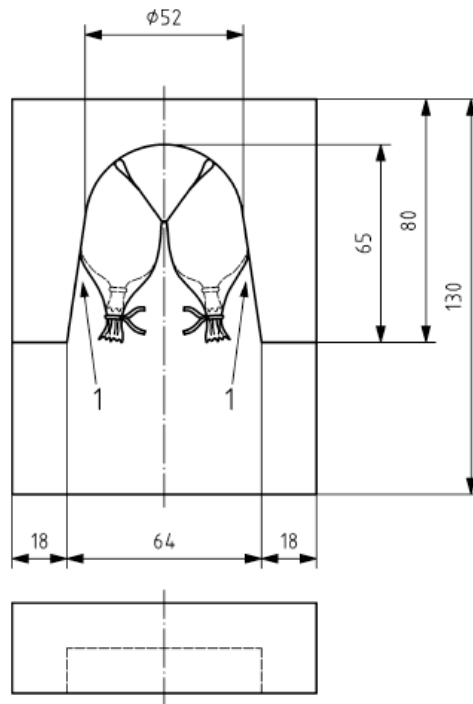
How to roll the tubular bandage over the test specimen
